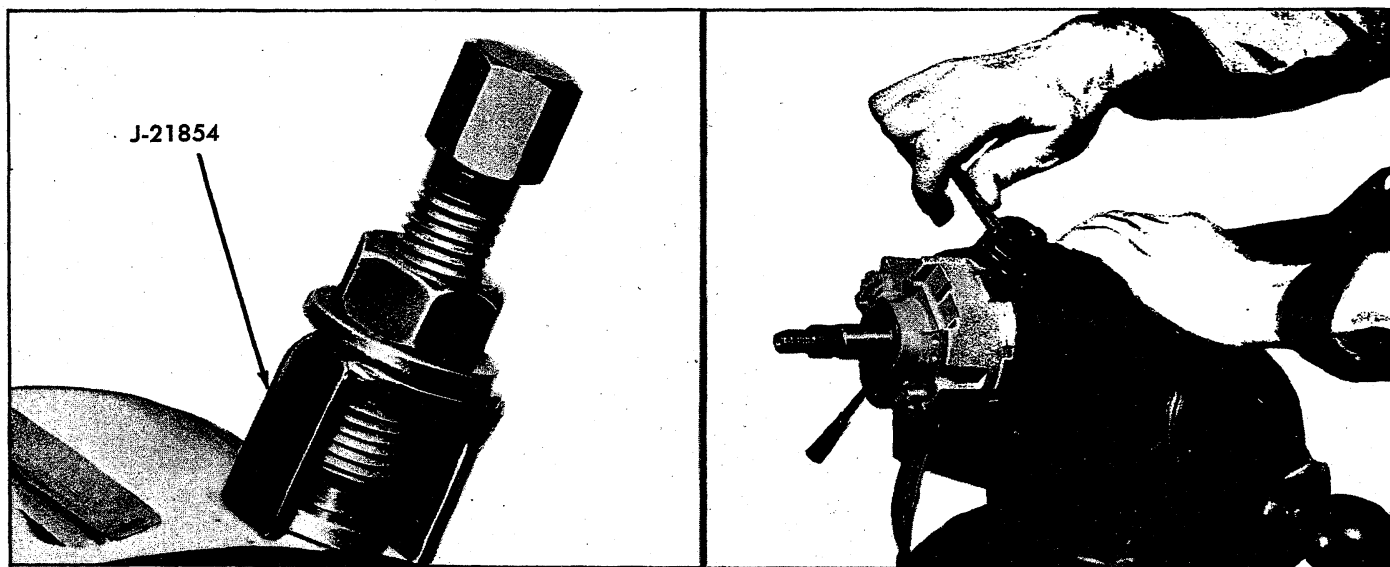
Removing Pivot Pins Using Pivot Pin Removal Tool J-21854
